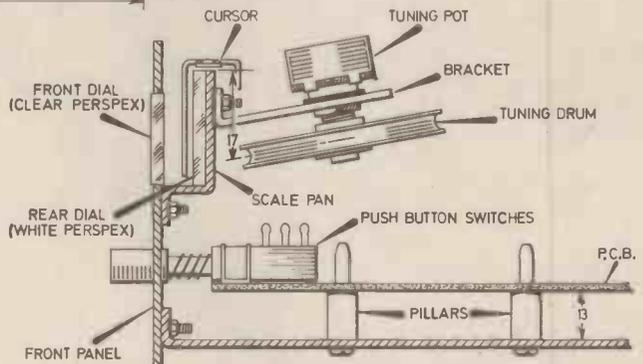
Side section showing general assembly of scale pan, tuning drive, pushbuttons and p.c.b. fixing.
